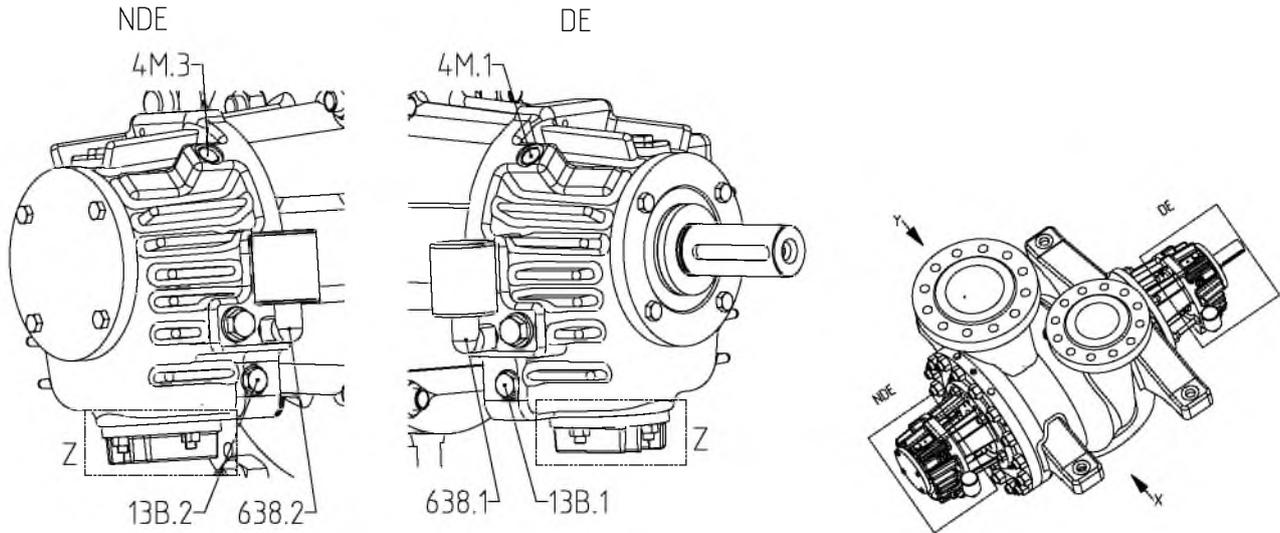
Bearing bracket connections - version with oil ring lubrication, view X
